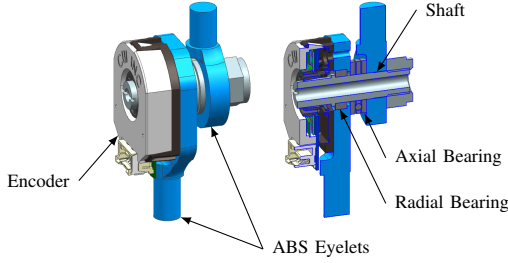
Design of the joint-encoder assembly. 3D model (left) and section view (right).
